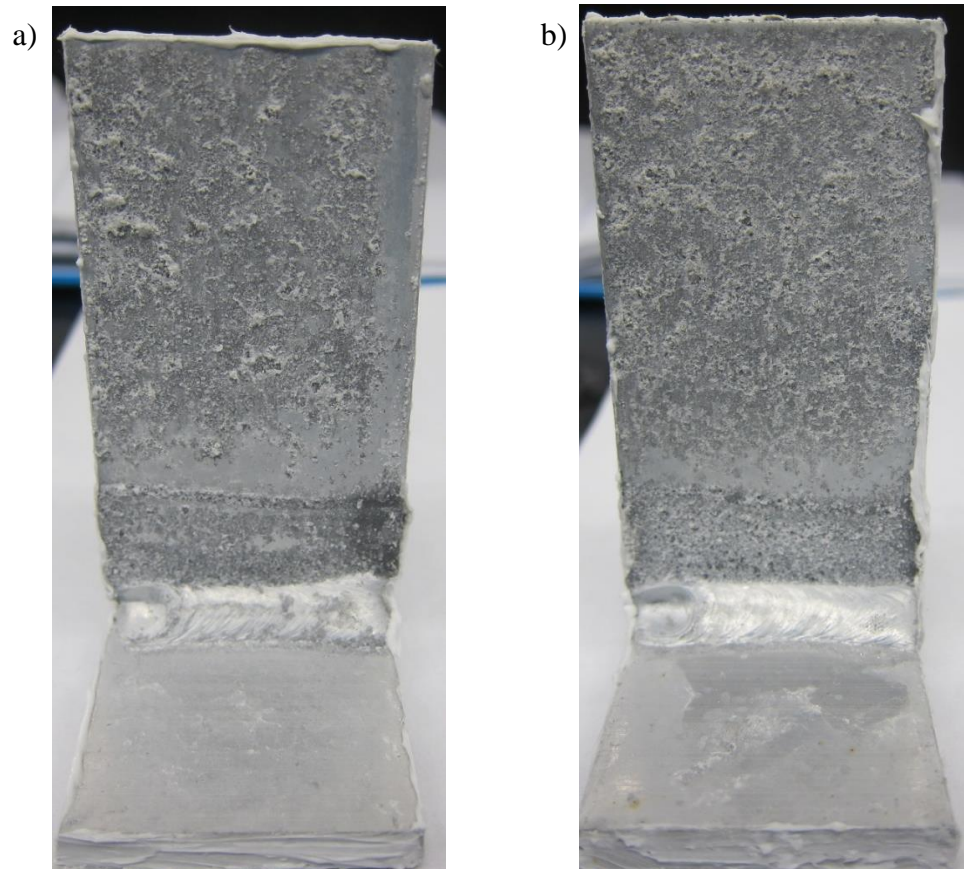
Duplicate samples of T-joint welded configuration E1 (ER5356/AA7003/L) in the as-welded T6 condition.
